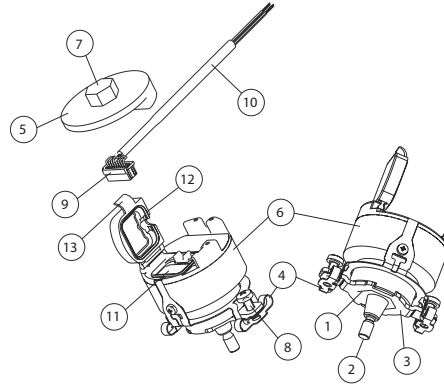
Motor feedback system with tapered shaft and spring mounting support
